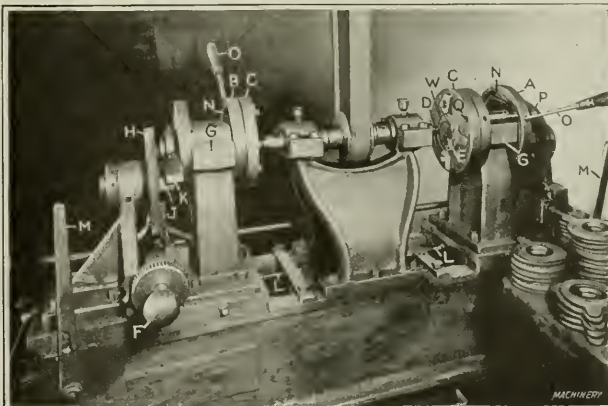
Special Duplex Milling Machine used for machining Slots in Die-stock Cam-plates
